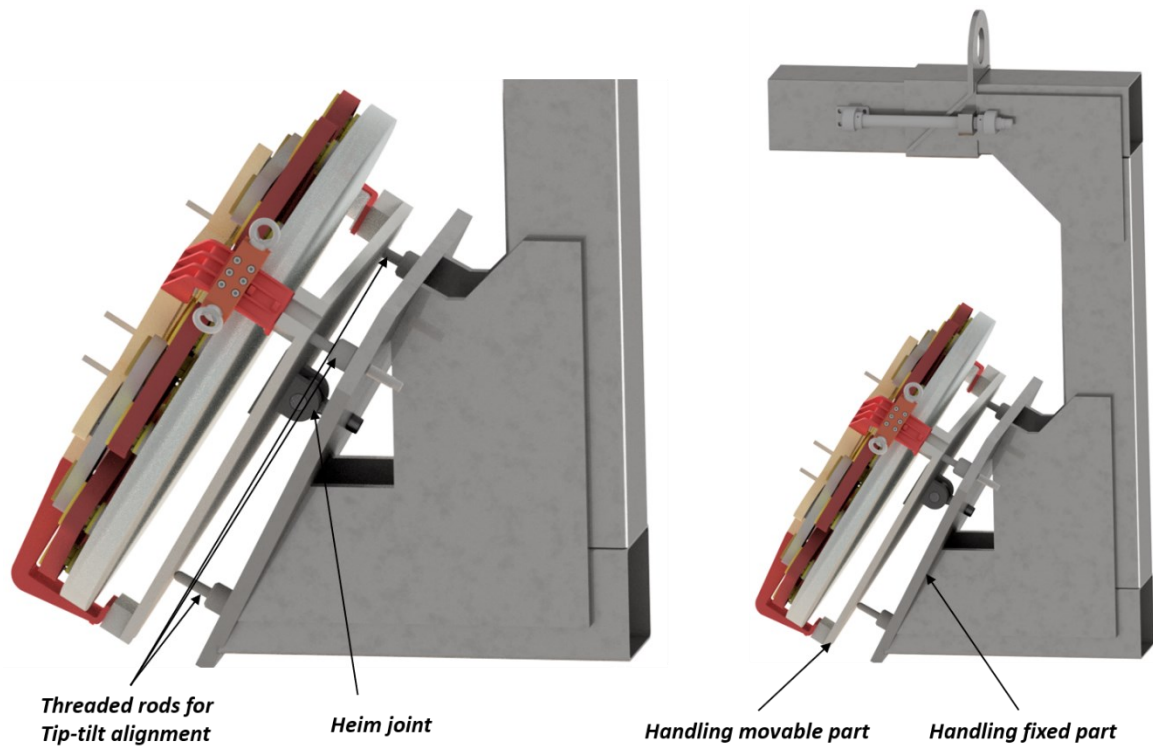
the handling allows to fine adjust tip-tilt of the mirror before installation, thanks to a heim joint and 3 threaded rods pushing against the movable part of the handling.
